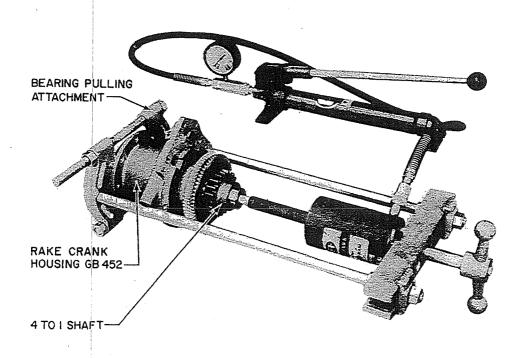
4 to 1 Shaft, Installation of Rake Crank Housing GB452
